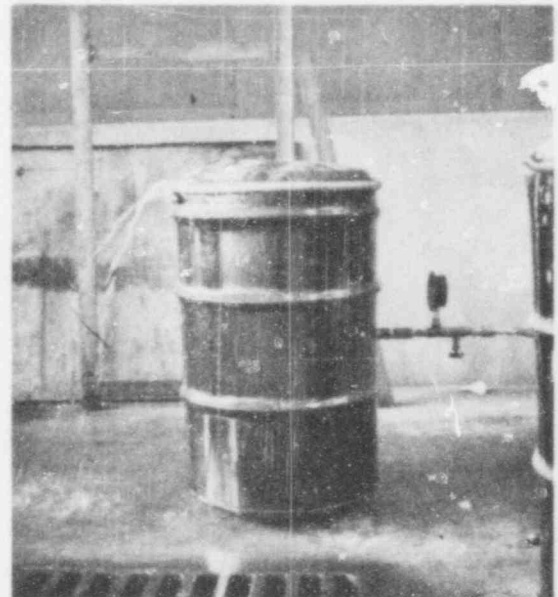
17C 16 Gage Removable Head Drum After 45 PSIG Maximum Burst Pressure.
